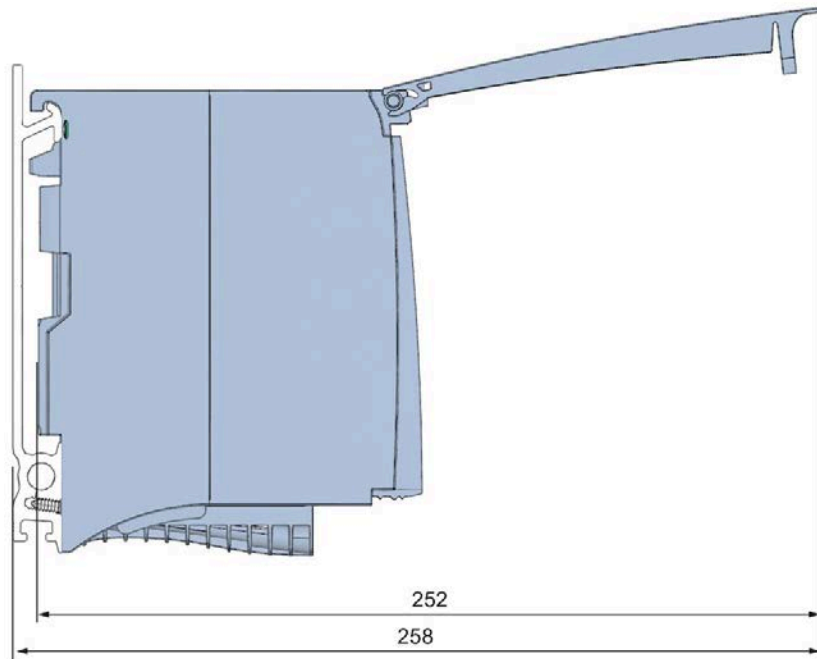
Dimensional drawing of the PS 60W 24/48/60VDC HF module
